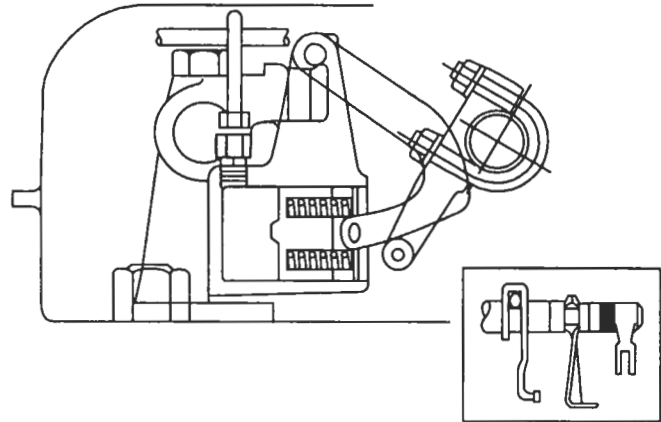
Fuel Modulator Assembly – Early Turbocharged Industrial Engines
